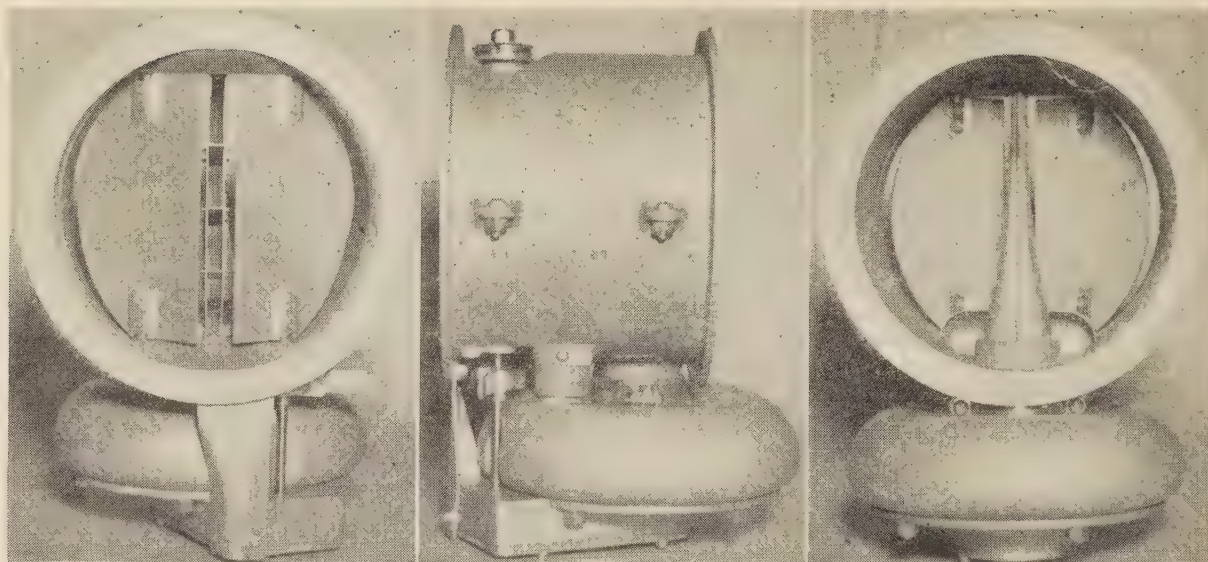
CONTROL UNIT IS AN INTEGRAL PART OF THE MODULATING VALVE
